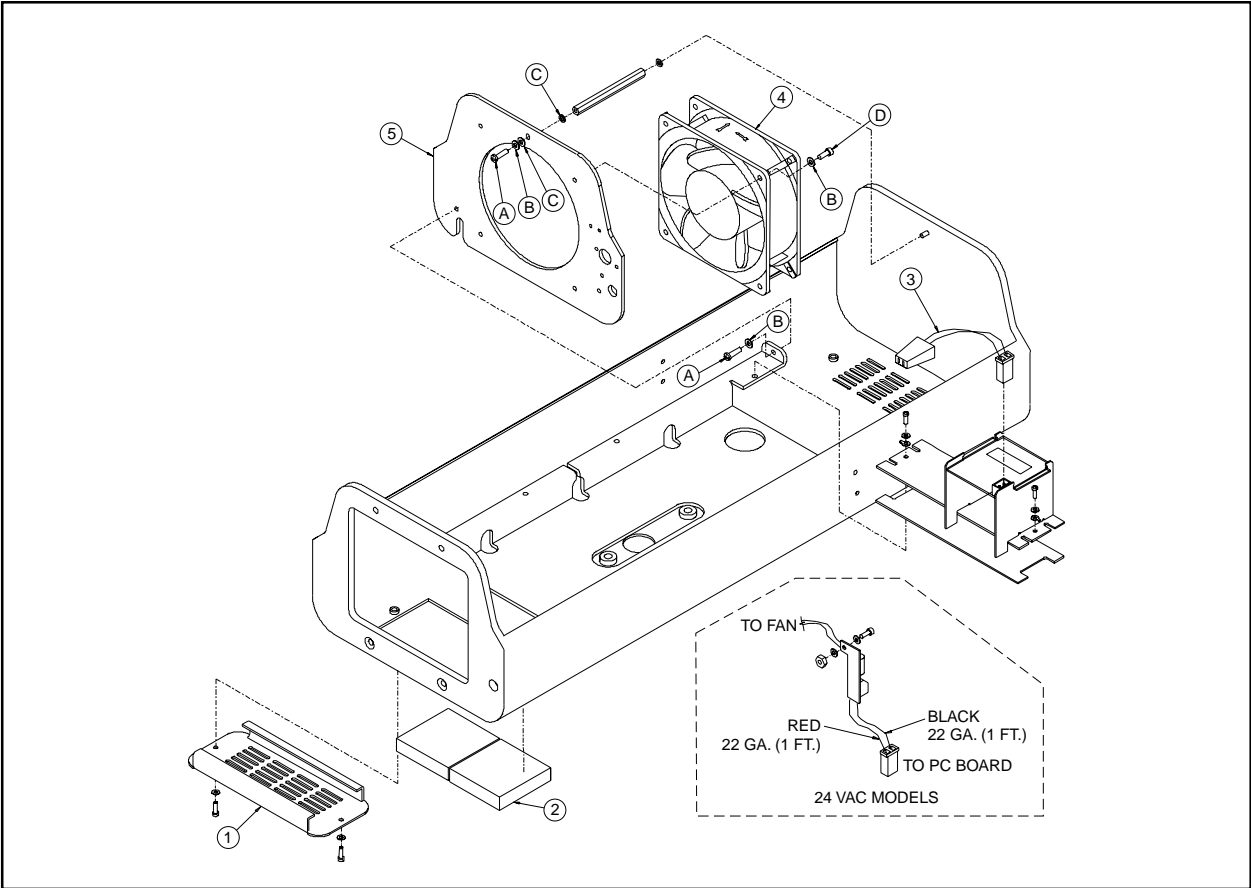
Exploded Assembly Diagram for Blower and Circuit Board
